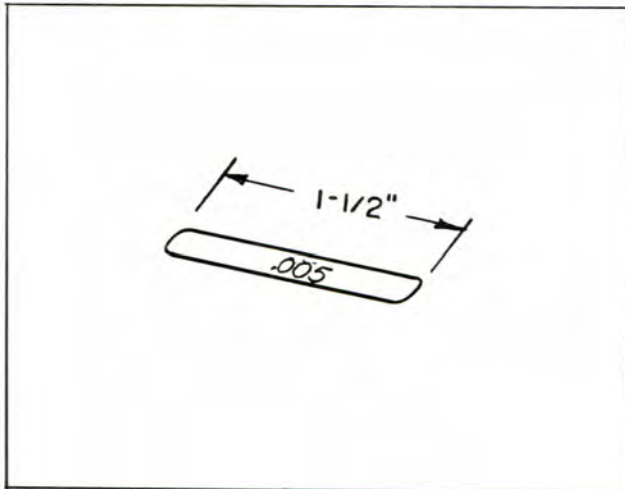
Typical Brass or Steel Shim Stock .005" Thick.
